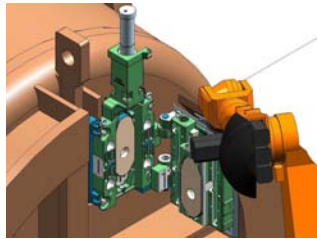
Coupling of mounting cylinder with SNAP coupling.
